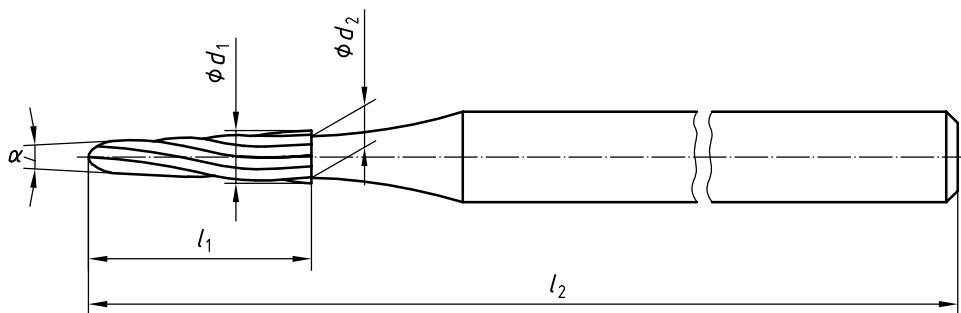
Torpedo, cylindrical, head length 10 mm, carbide finishing burs
